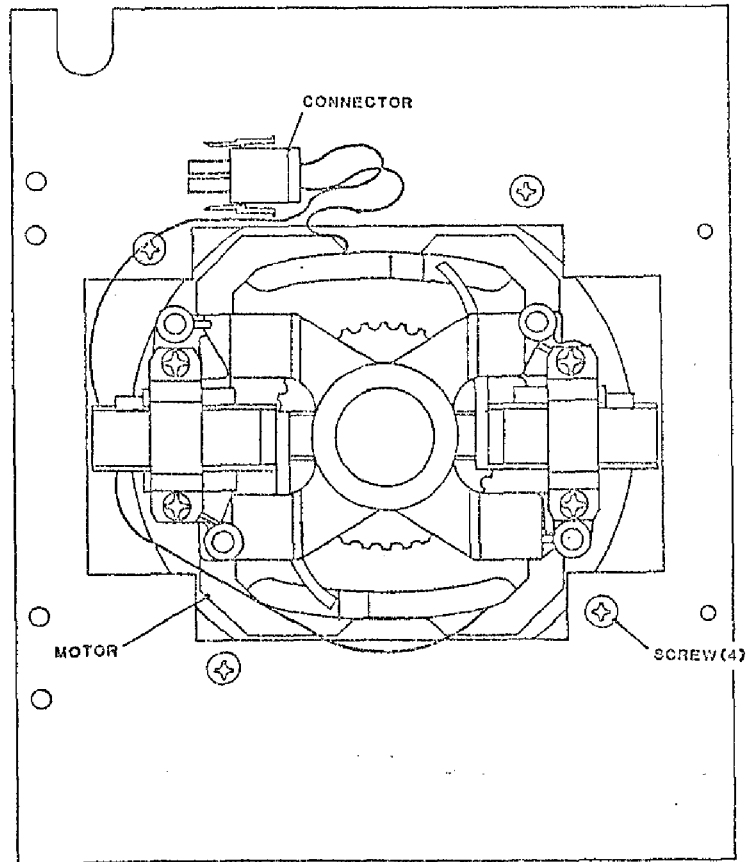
Vacuum Motor Assembly, Shaft End View (Cover Removed)
